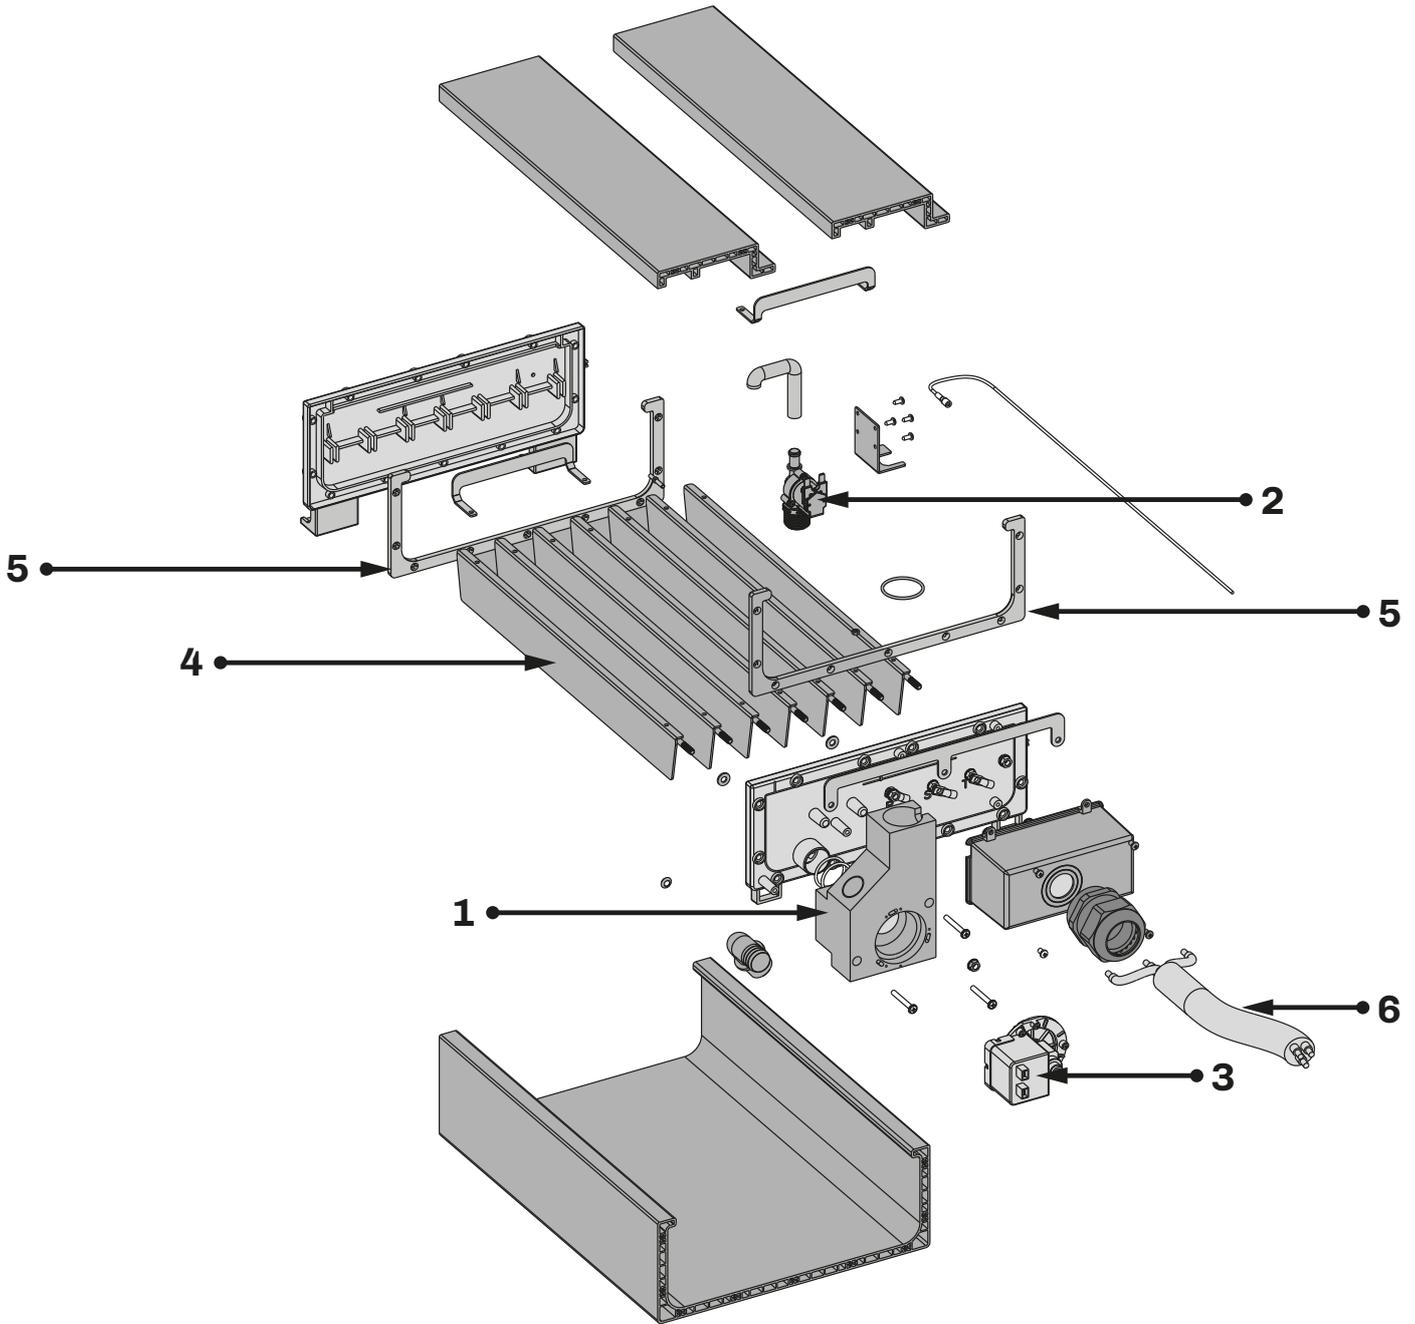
Spare parts for VEH OEM - Hydraulic unit
